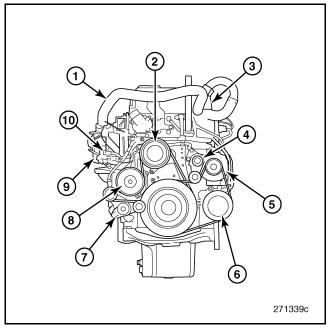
Primary and Secondary Drive Belts — LCF Chassis (N/A Australia)
